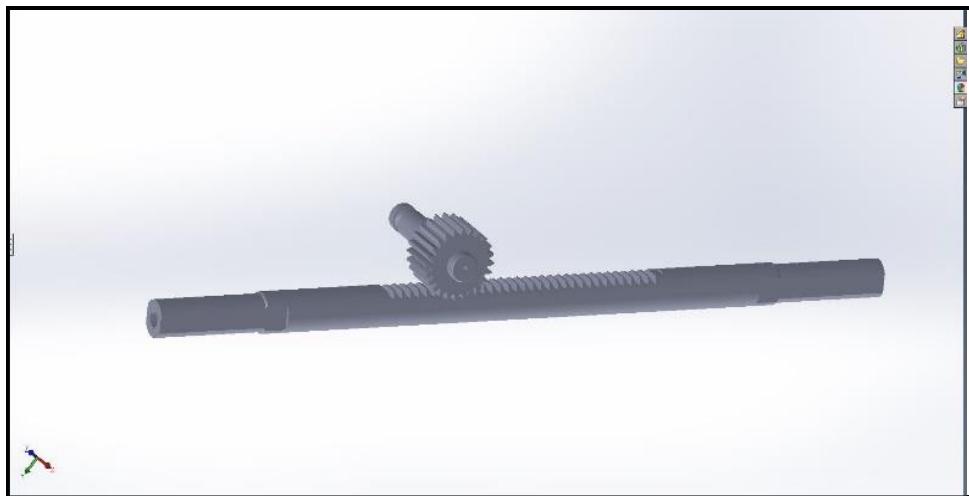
Cad model of Rack and Pinion in SOLIDWORKS
